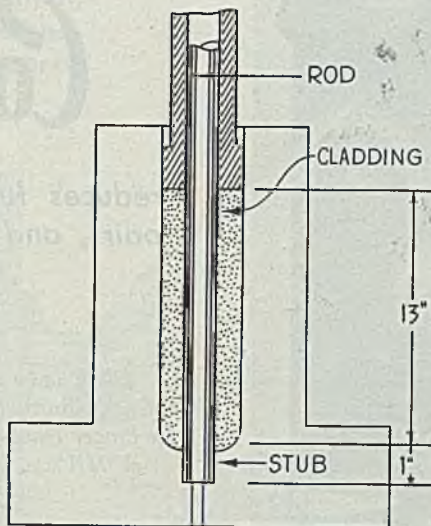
Tooling setup for compressing powdered metal onto base wire
